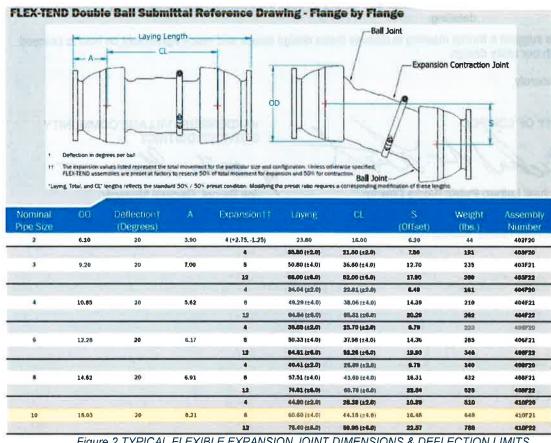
TYPICAL FLEXIBLE EXPANSION JOINT DIMENSIONS & DEFLECTION LIMITS
